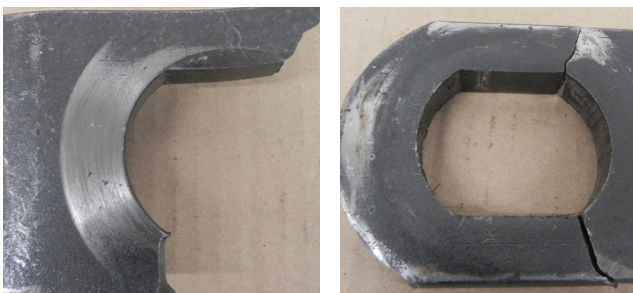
Rubbing wear from the roller on the inner surface of the head end sidebar (left); rubbing wear from contact with the adjacent sidebar on the outer surface of the cotter end sidebar (right).
